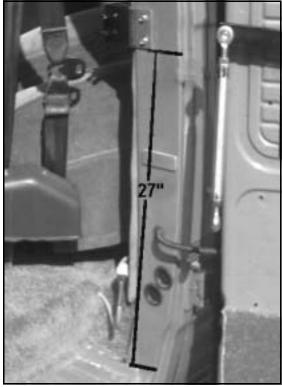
ANGLE/CLEVIS BRACKET ASSEMBLY MOUNTING LOCATION
